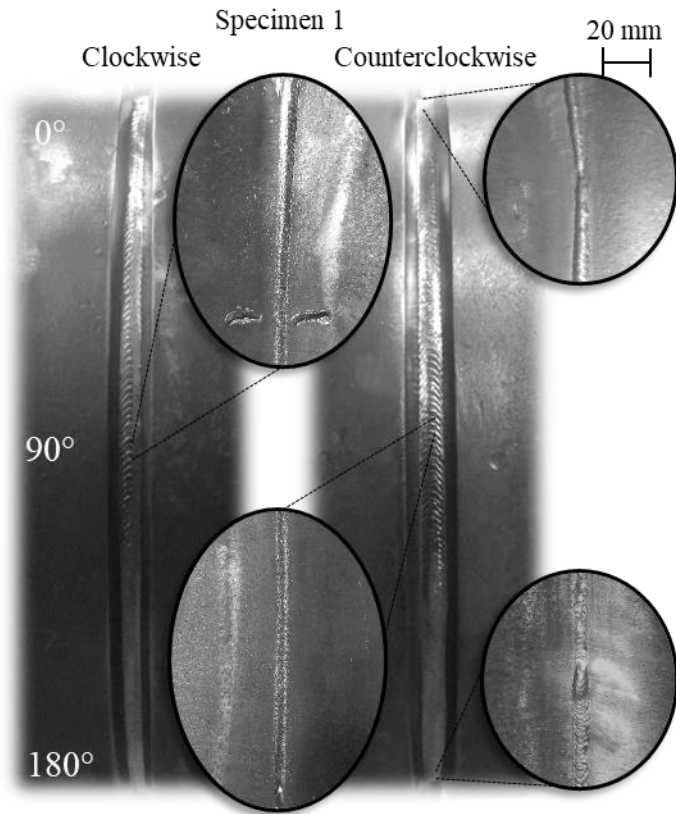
RESULTS OBTAINED FOR SAMPLE 1 USING THE AI ADAPTIVE ORBITAL WELDING ALGORITHM (WHEN PRESENT, TRANSVERSAL MARKS ASIDE THE ROOT (BOTTOM) VIEW WELDS ARE NOT A WELD DEFECT, HOWEVER MARKS OF THE C ASSEMBLY FIXING ACCESSORY).
